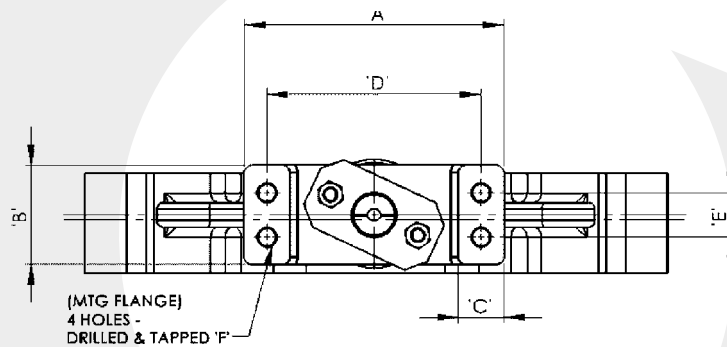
Topworks details – mounting bracket and gland mounting detail - Double-Offset (BU02)
